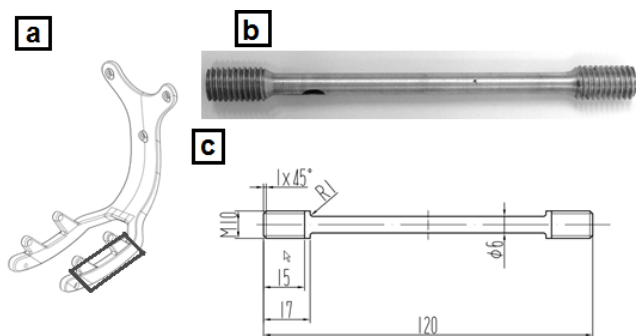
Place of taking material for the test specimen (a), view of the machined test specimen (b), dimensions of the test specimen (c)
